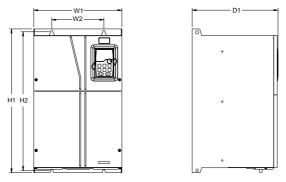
660V 22–132kW VFD wall-mounting diagram
